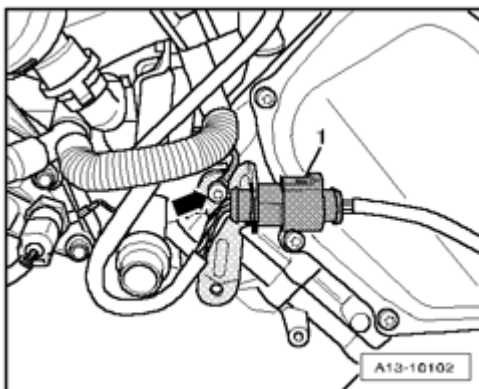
Disconnecting Electrical Connector & Removing Bolt & Retainer For Connection
